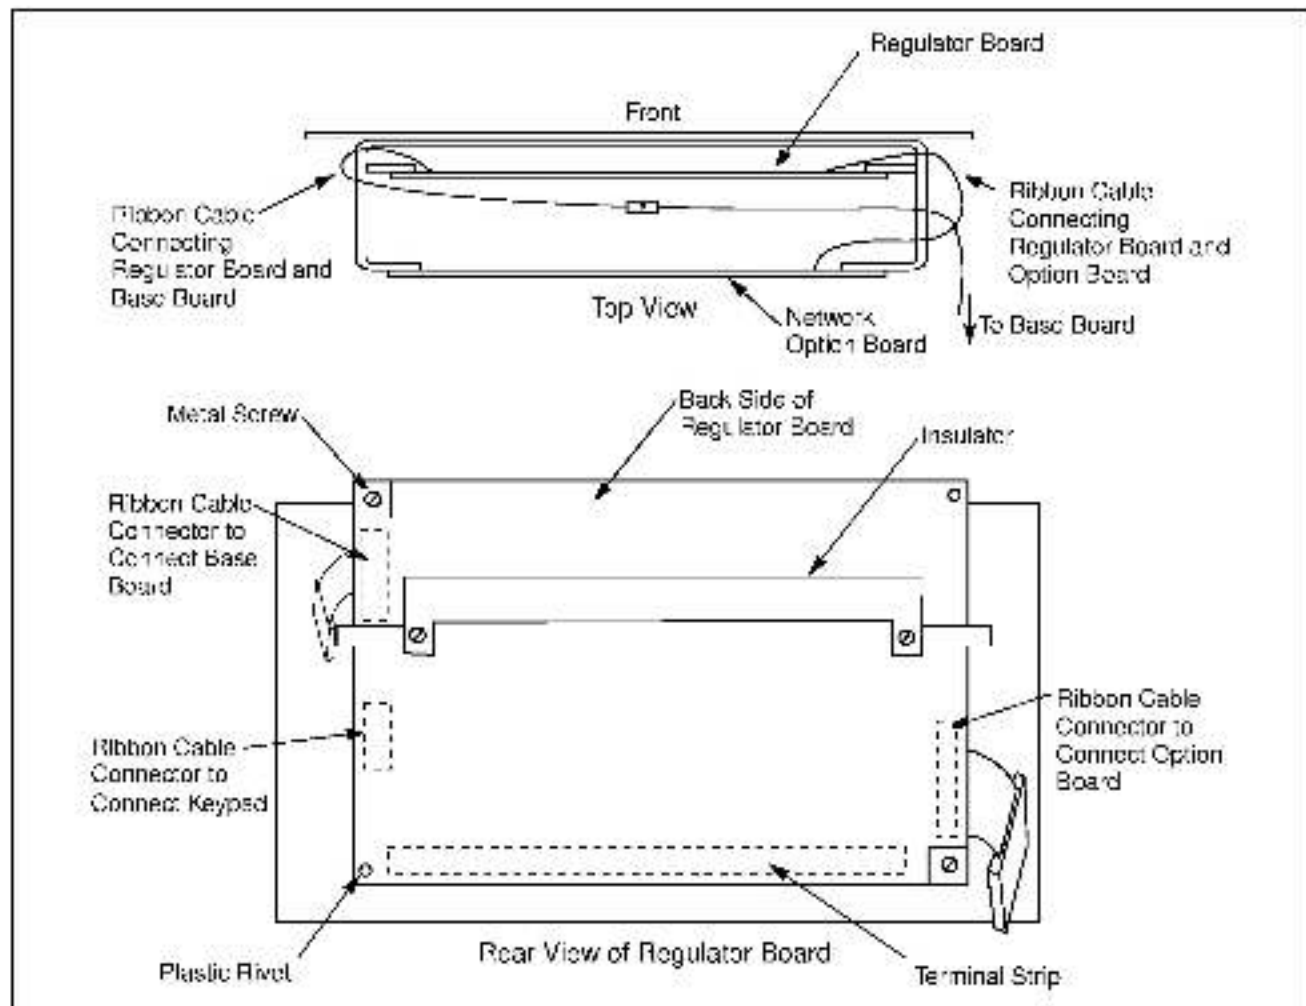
Regulator Board's Connections to Option Board, Keypad, and Base Board
